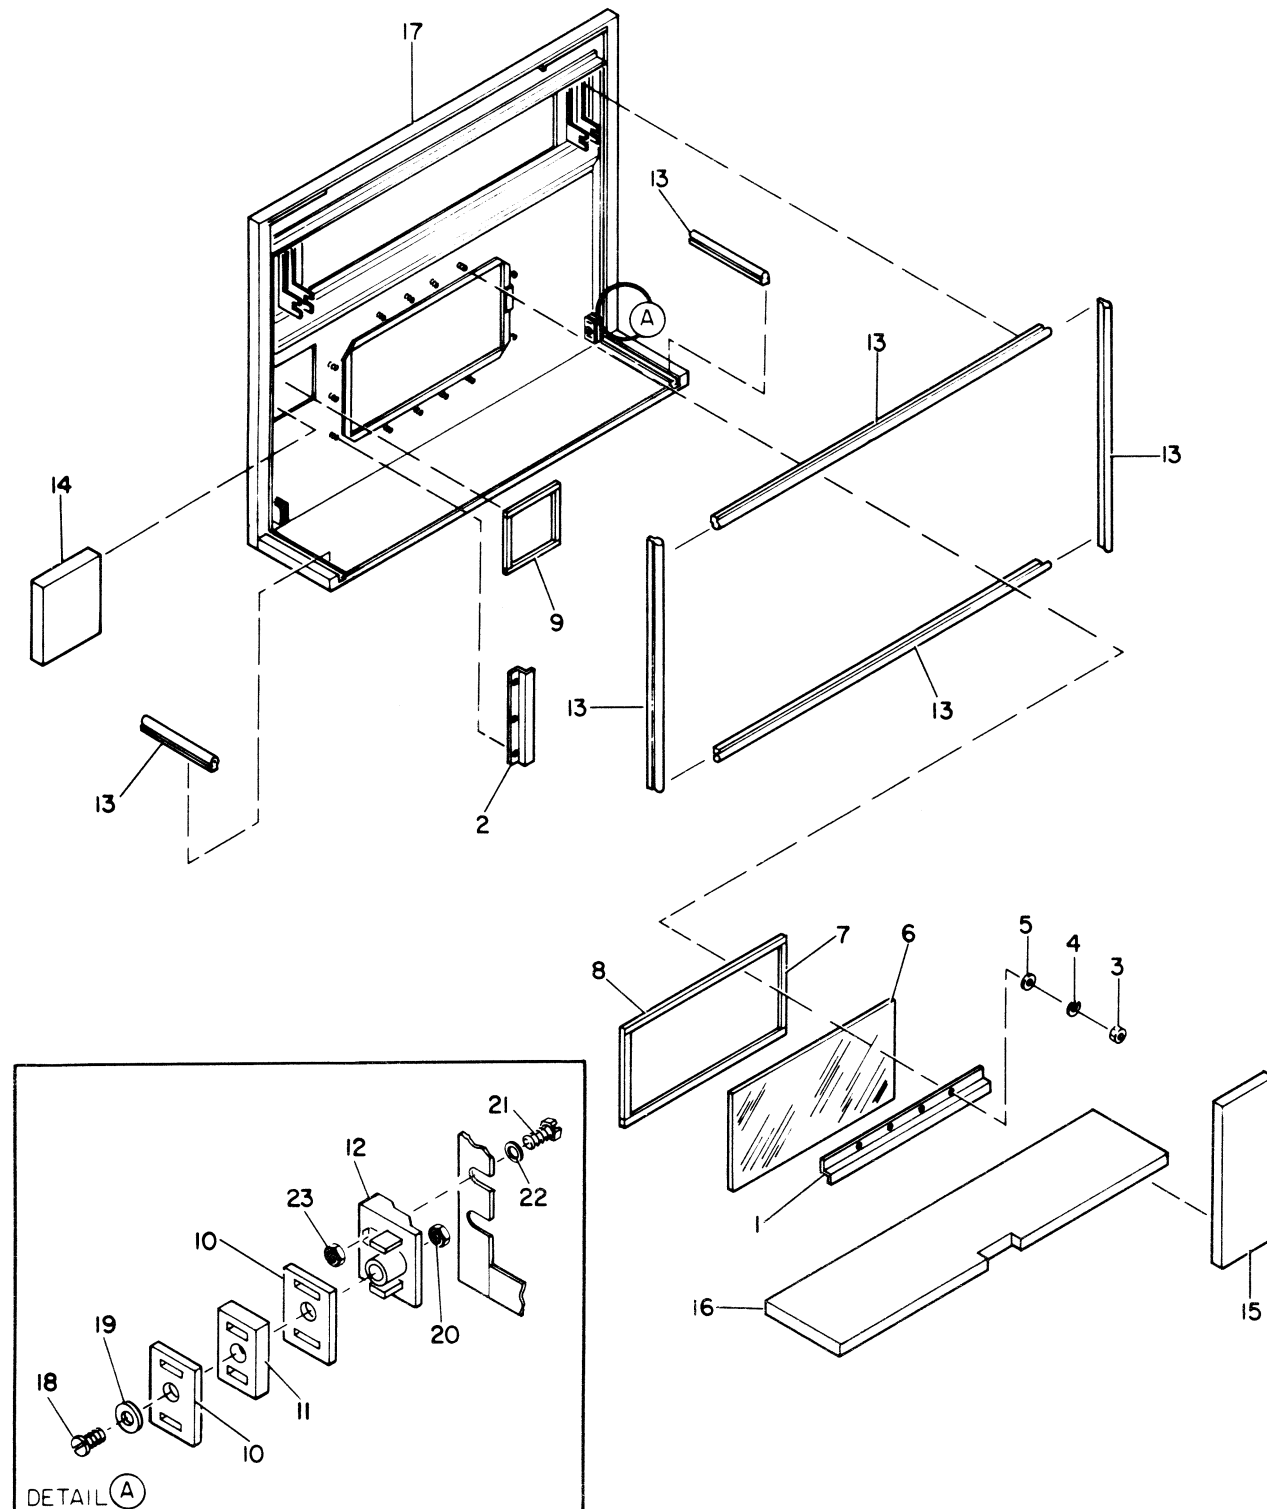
TOP COVER ASSEMBLY. SEE LIST 4.
